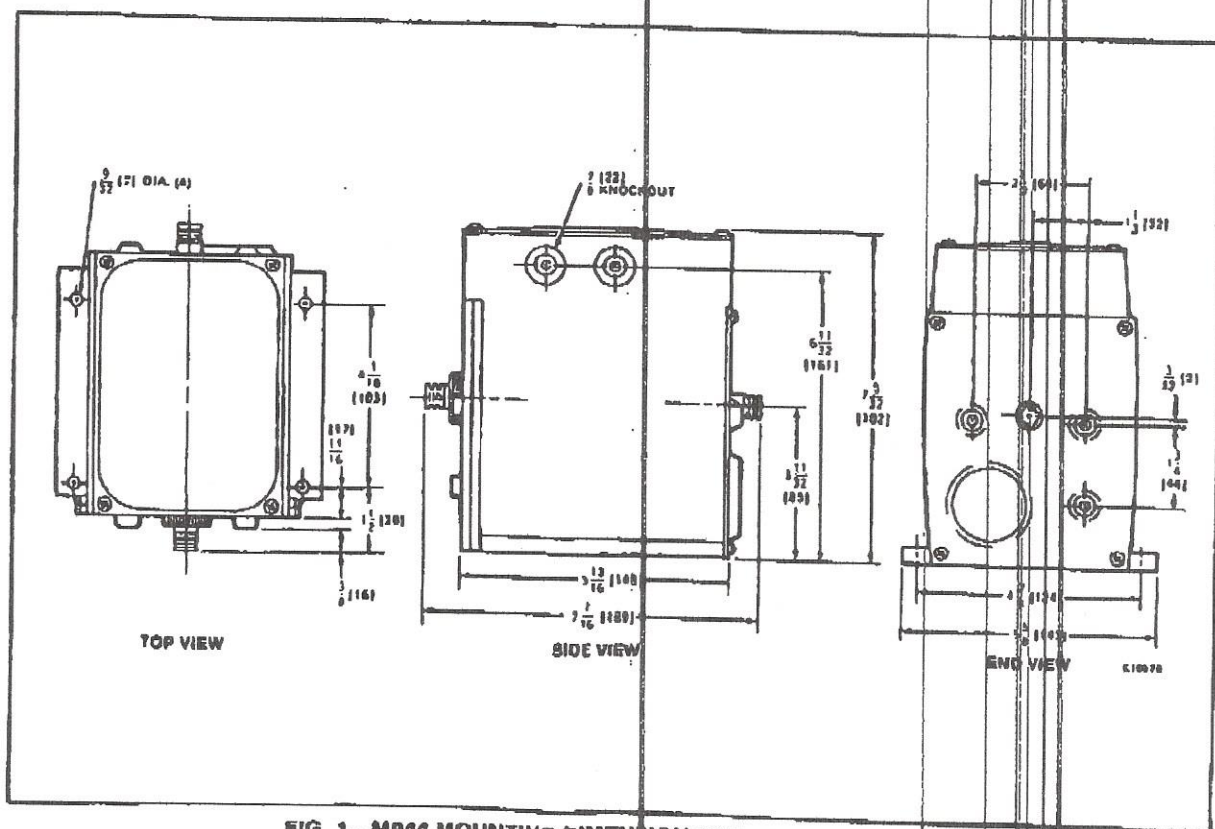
M944 MOUNTING DIMENSIONS IN in. [mm IN BRACKETS].
